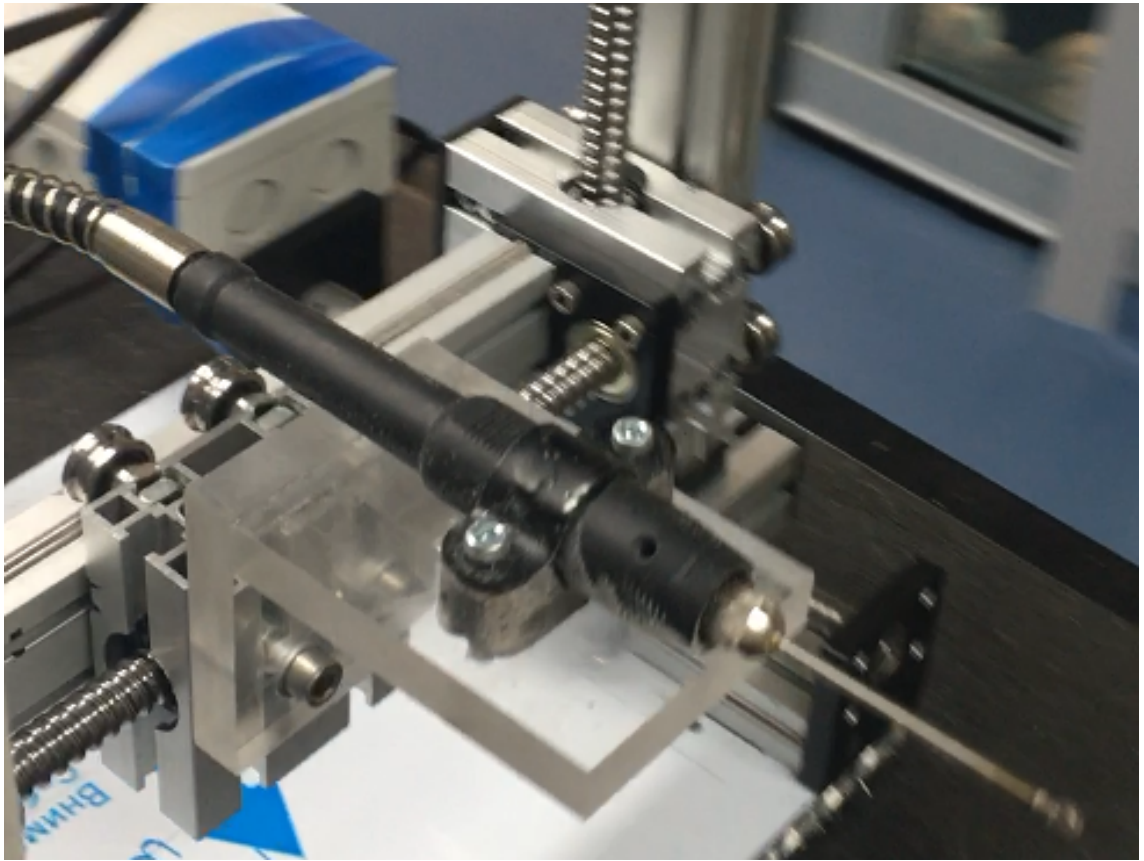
Cutting Burr Fixed inside flexible tube and on also carriage
